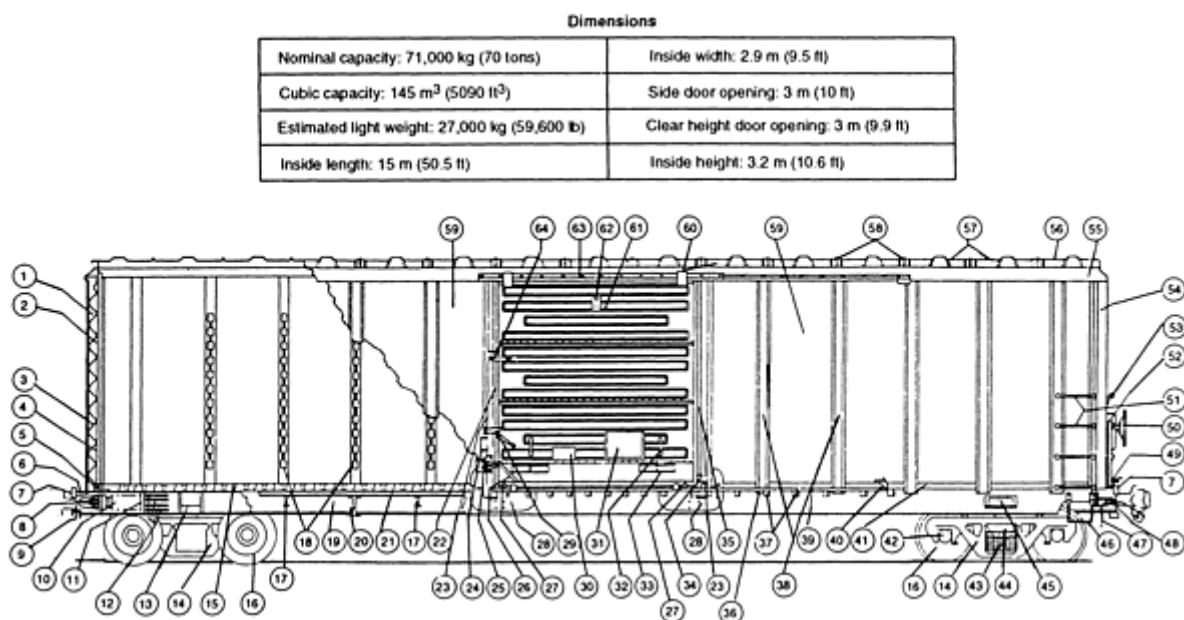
SIDE VIEW OF A GENERAL-PURPOSE BOXCAR. 1, END SHEET (TOP); 2, END LINING (TOP); 3, END SHEET (BOTTOM); 4, END LINING (BOTTOM); 5, END SILL; 6, STRIKER FACE RIB; 7, STRIKER FACE; 8, KEY SLOT LINER AND FRONT DRAFT LUG; 9, COUPLER CARRIER; 10, DRAFT GEAR; 11, FRONT DRAFT GEAR STOP; 12, REAR DRAFT LUG RIBS; 13, COMBINATION CENTER FILLER/CENTER PLATE; 14, TRUCK FRAME; 15, AVAILABLE STEEL FLOORING; 16, WHEEL; 17, FLOOR BEAM; 18, LADING STRAP ANCHOR; 19, CENTER SILL; 20, CROSSBEARER; 21, FLOOR STRINGER; 22, DOOR FRONT STOP; 23, DOOR POST; 24, DOOR LOCK BRACKET; 25, DOOR LOCK; 26, DOOR LOCK REINFORCING GUSSET; 27, DOOR ROLLERS; 28, DOOR POST AND SIDE SILL GUSSET; 29, STARTER AND CLOSURE LEVER; 30, ROUTING BOARD; 31, PLACARD BOARD; 32, DOOR HANDLE; 33, FORKLIFT PUSHER BLOCK; 34, DOOR CATCH; 35, SPARK STRIP; 36, SIDE SILL REINFORCEMENT; 37, DOOR TRACK BRACKET; 38, SIDE POST; 39, DOOR TRACK (BOTTOM); 40, DOOR CATCH ASSEMBLY; 41, SIDE SILL; 42, AXLE; 43, TRUCK SPRINGS; 44, TRUCK BOLSTER; 45, JACKING PAD; 46, SILL STEP; 47, UNCOUPLING ROD; 48, KEY SLOT; 49, CROSSOVER STEP; 50, HAND BRAKE WHEEL; 51, LADDER GRAB; 52, LADDER STILE; 53, GRAB; 54, CORNER POST; 55, SIDE PLATE; 56, ROOF SHEET (END); 57, ROOF SHEET (INTERMEDIATE); 58, SEAM CAP; 59, SIDE SHEET (PLAIN); 60, DOOR SAFETY HANGER; 61, SLIDING DOOR; 62, LIFTING LUG; 63, DOOR TOP RETAINER; 64, ANTIPILFERAGE LOCK. COPYRIGHT SIMMONS-BOARDMAN PUBLISHING COMPANY/THE RAILWAY EDUCATIONAL BUREAU. REPRODUCED WITH PERMISSION
